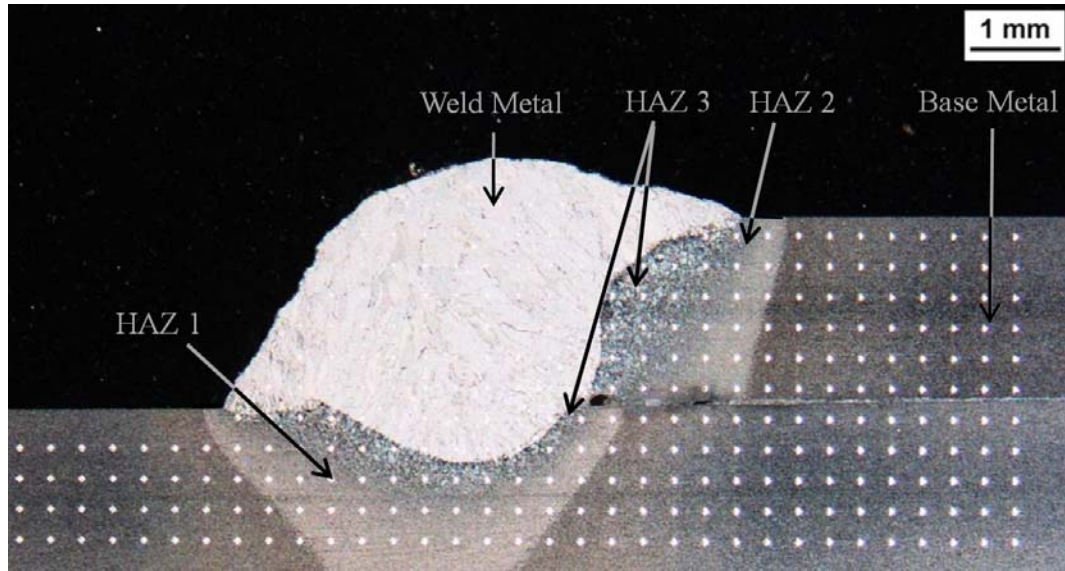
An optical micrograph of the cross section of a 10 mm weld specimen.
